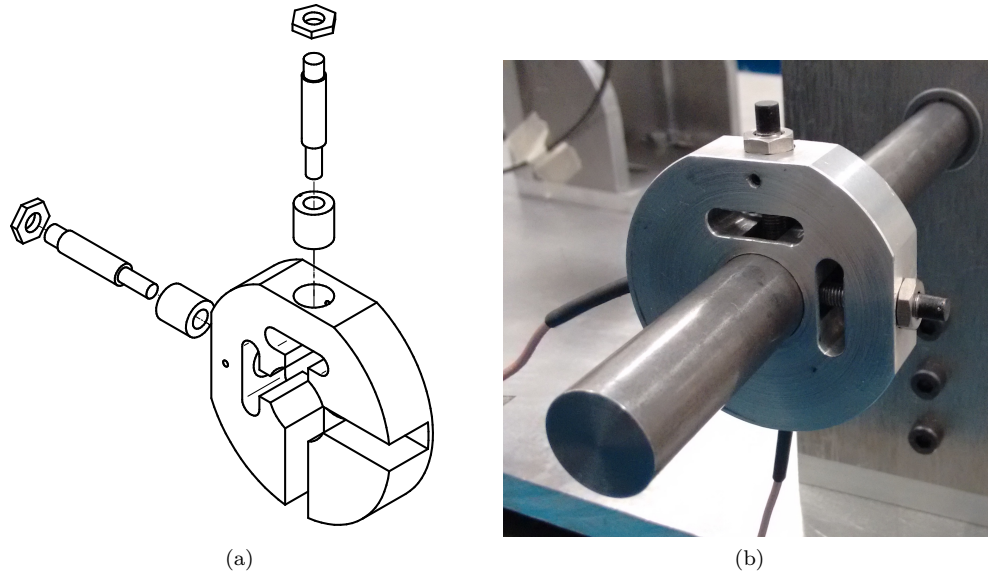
Holding the sensors inside of the rotor requires a custom bracket and a hole through the supporting shaft
